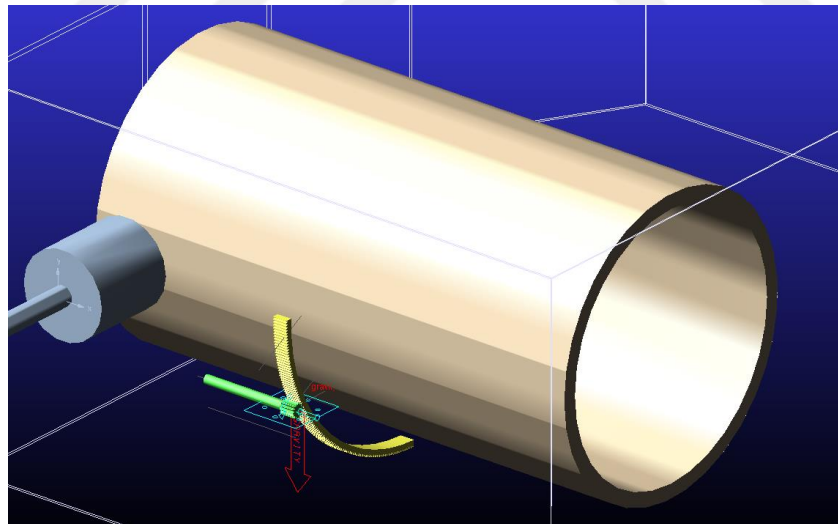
Isometric view of the turret (turret hull top and front not shown for clarity)
